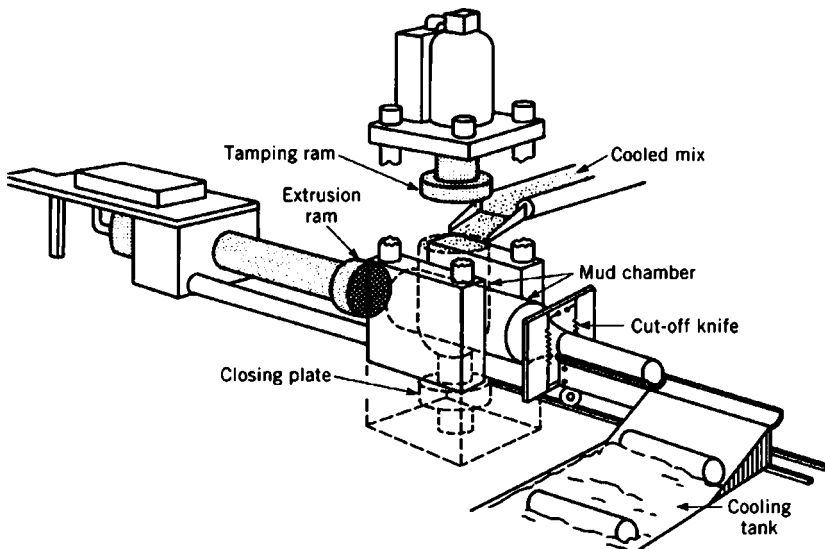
Tilting extrusion press. (Courtesy of UCAR Carbon Technology Corp.)
